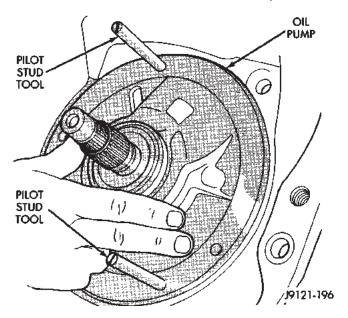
Installing Oil Pump And Reaction Shaft Support
